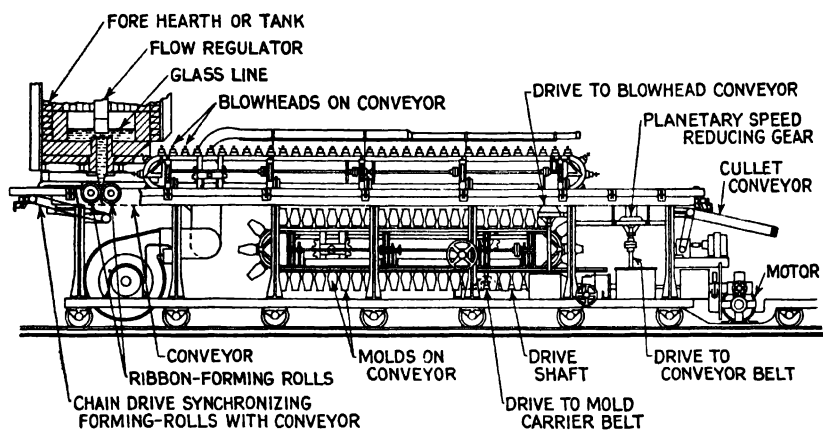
Corning Bulb Machine. Courtesy *The Glass Industry*.
